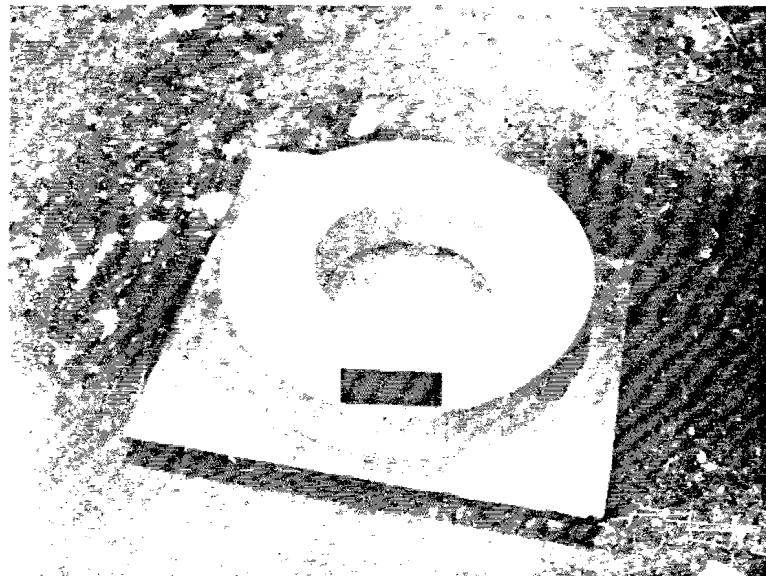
"Break-up" type pottery plaster draw ring mold with metal inserts removed.
